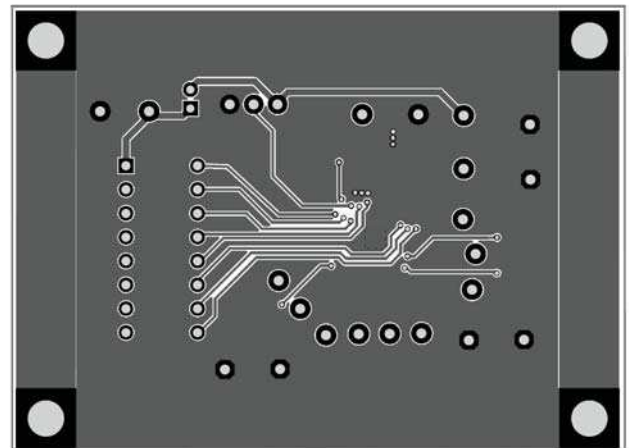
AAT2608A Evaluation Board Bottom Side PCB Layout.
